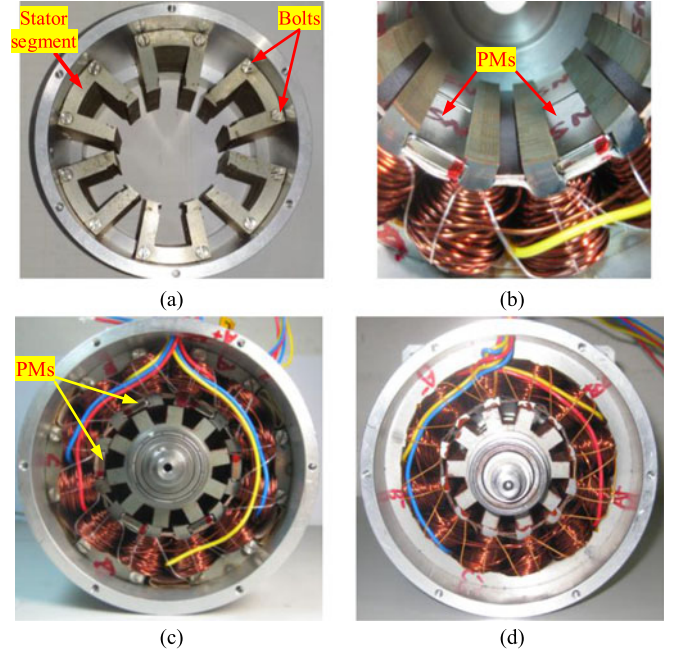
Photographs of two SRM prototypes. (a) Segmented stator cores, (b) PMs and (c) motor assembly of the segmented HESRM. (d) Motor assembly of the conventional SRM.
